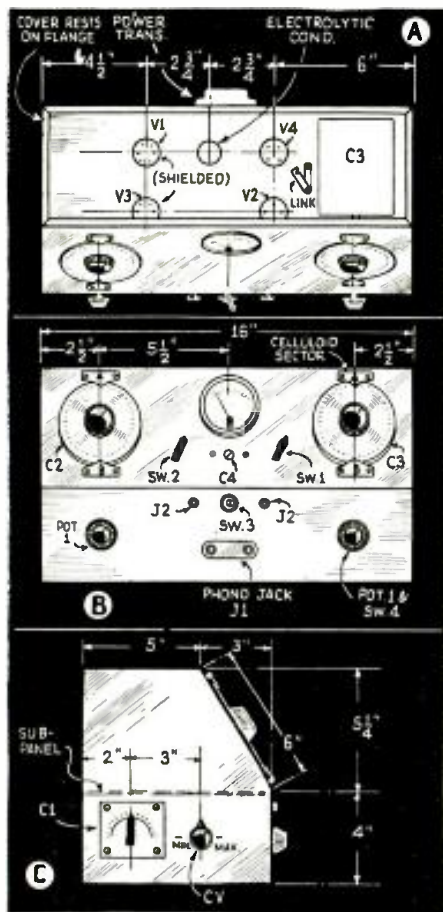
Details of the cabinet and chassis, including the layout of the parts. Both the chassis and cabinet are made from sheet aluminum.
